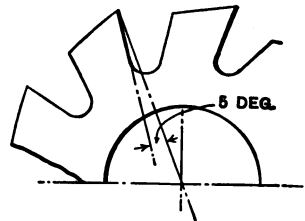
Method of Making High-Speed Steel Cutters to Insure Long Service
